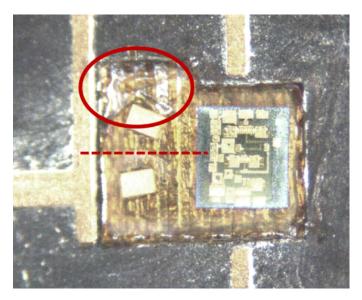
The BCB die fill material in a large MPA pocket has receded due to material shrinkage and bubbling during the curing cycle.
